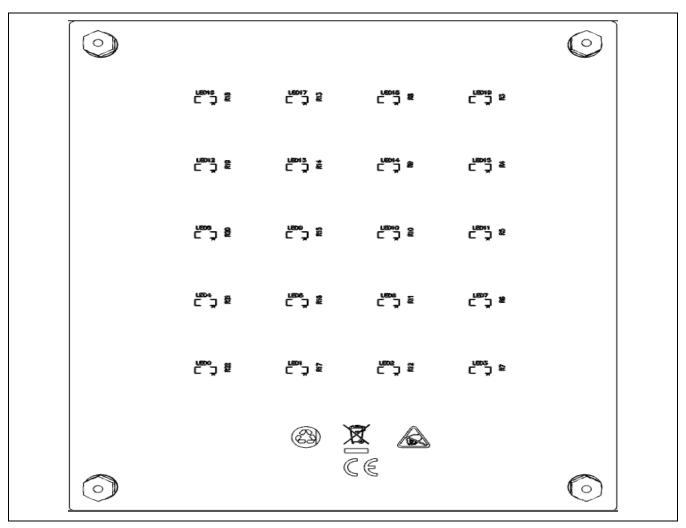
AE-CAP1-MC Touch Application Board Overall Component Placement, Bottom
